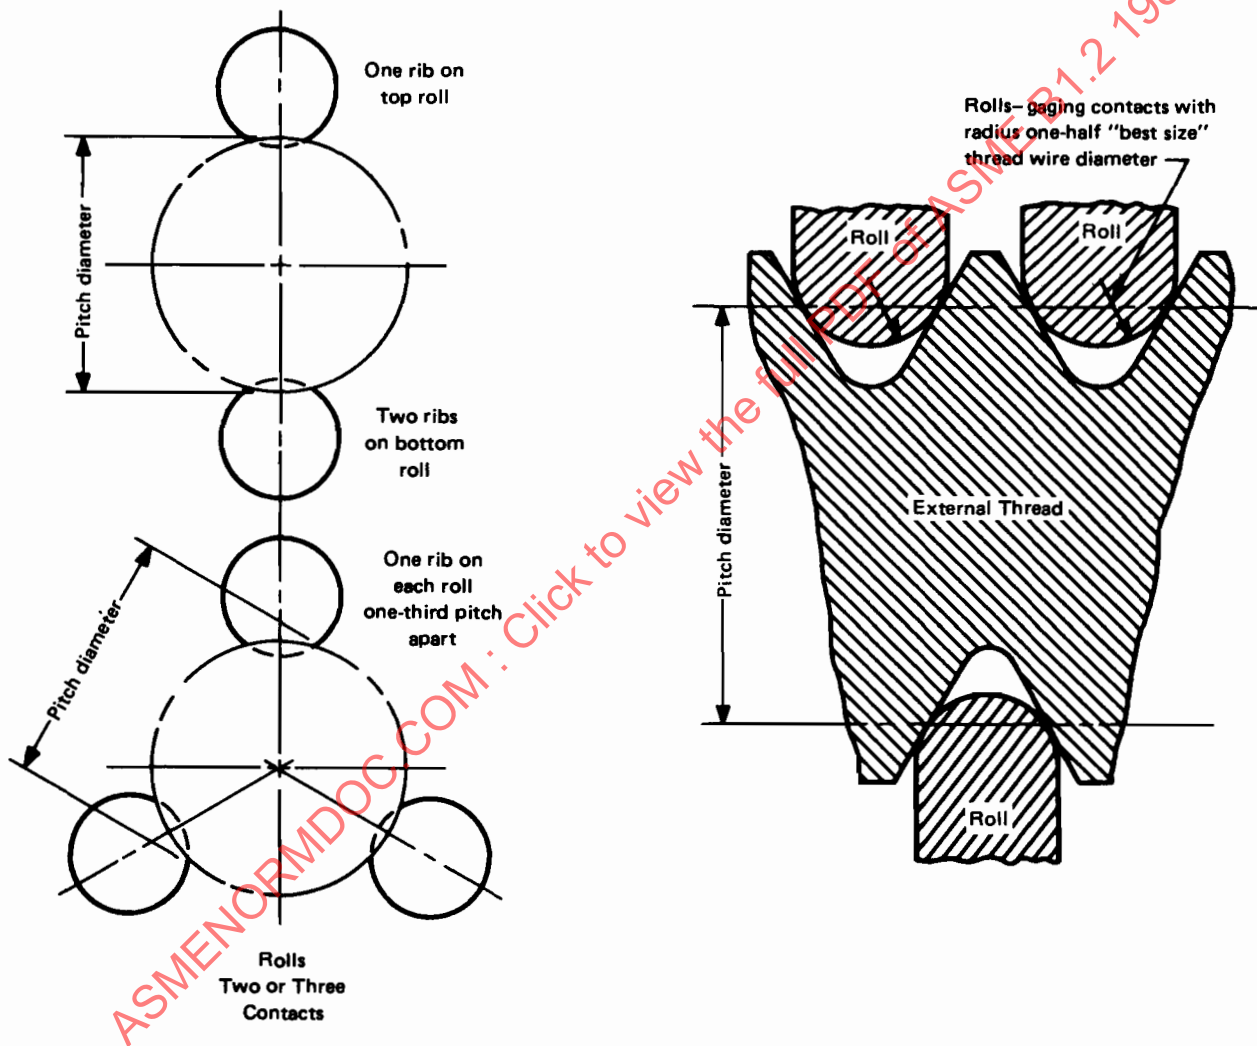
INDICATING THREAD GAGES—MINIMUM-MATERIAL THREAD GROOVE DIAMETER LIMIT AND SIZE
